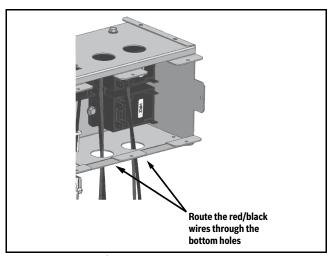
Route the Red/Black Wires through the Bottom Holes
